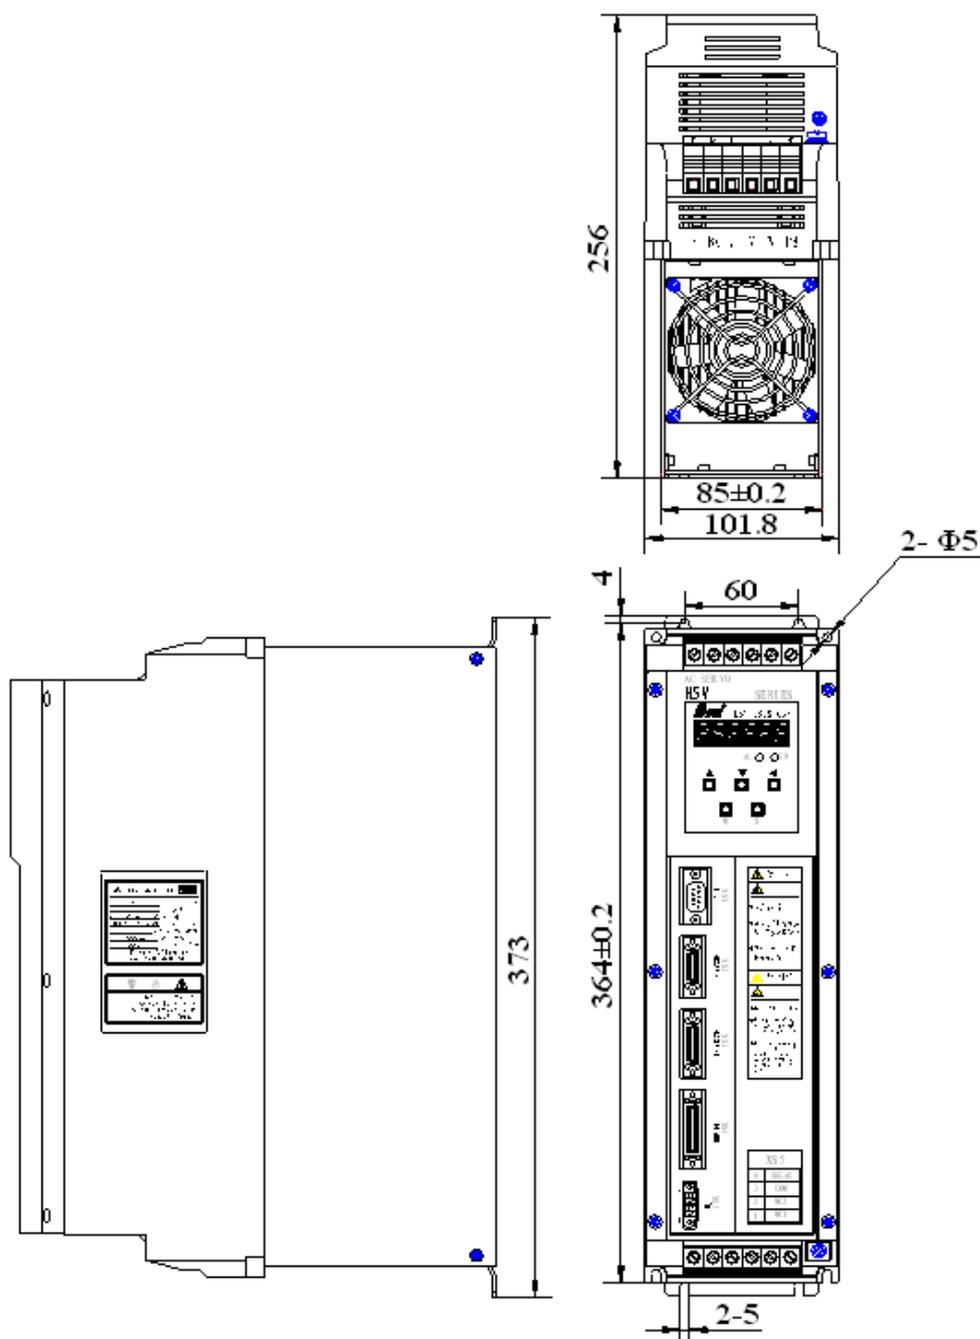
Dimension and size of HSV-180S-025, 035, 050, 075 (with auxiliary devices Unit: mm)
